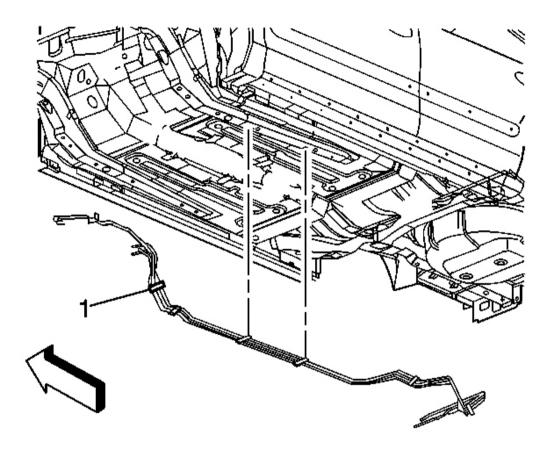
Fuel Pipe Assembly View Courtesy of GENERAL MOTORS CORP.
